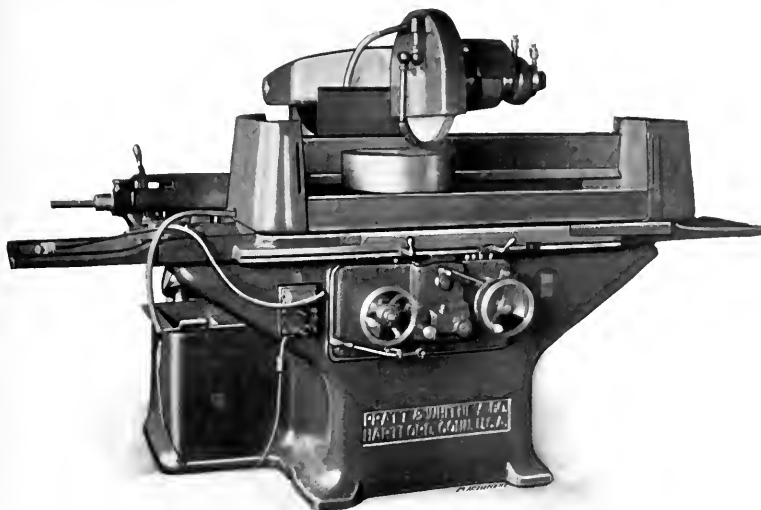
Front View of Pratt & Whitney Disk Grinder showing Control Mechanism
